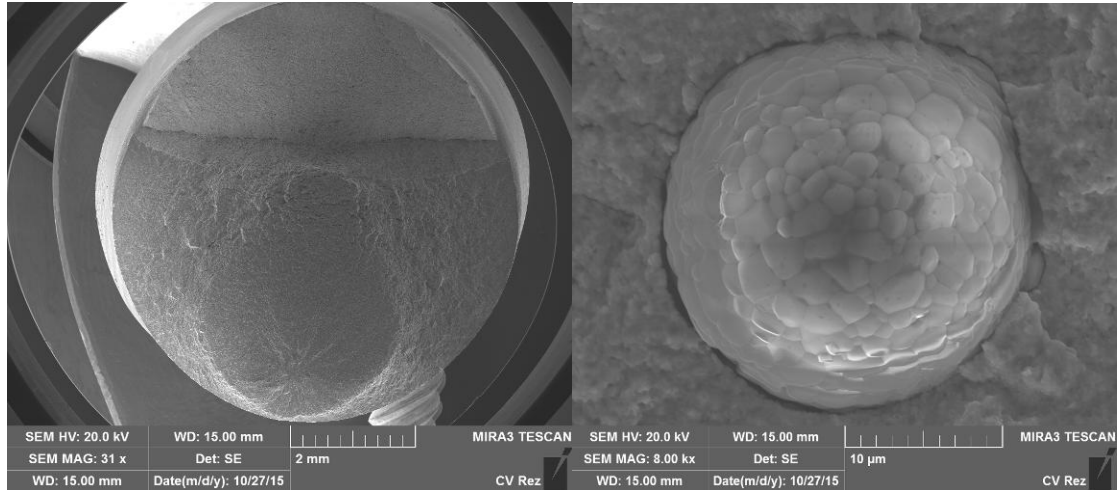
The fracture surface of the sample 5 with subsurface initiation (on the left) and focus of fracture surface with Al_2O_3 inclusion (on the right).
